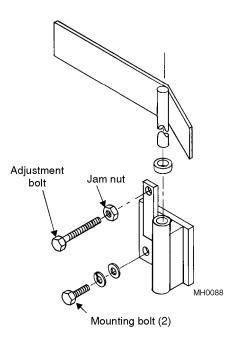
OPTIONAL CROWDER ASSEMBLY.
